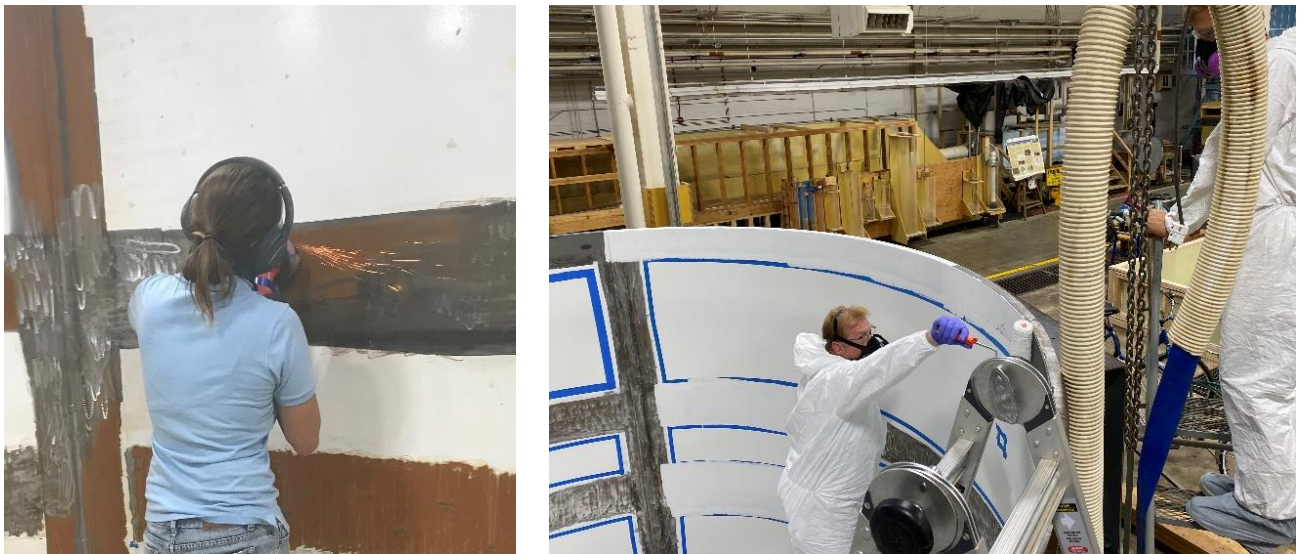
Grinding of bare steel areas after completion of welding (left) and roller application of protective coating system to the bare areas (right).
